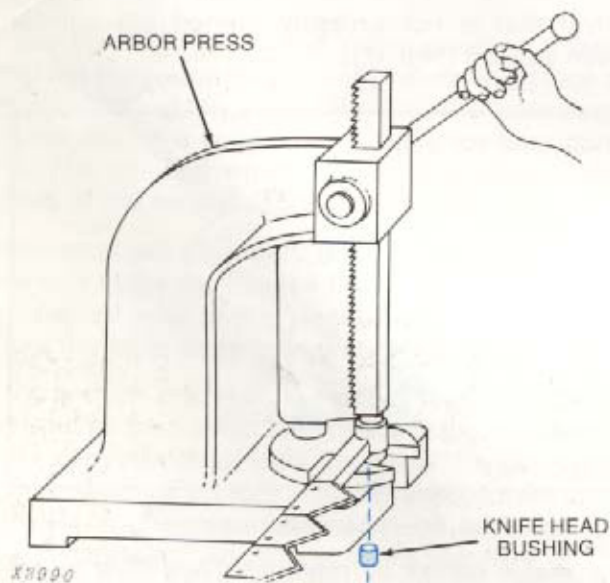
Removing A Knife Head Bushing With An Arbor Press
